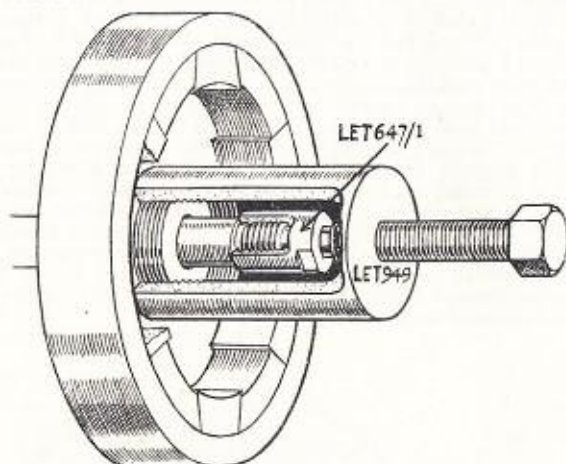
Drawing Flywheel from Flywheel Shaft.
